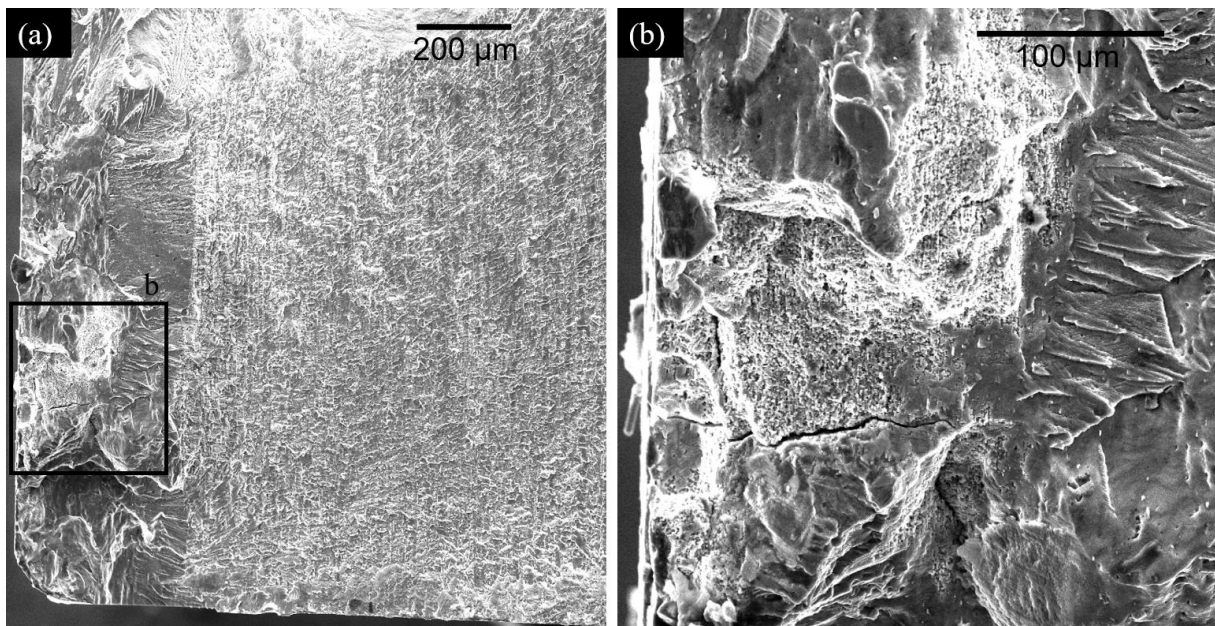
Fracture surface of as extruded specimen with 4 h pre-corrosion.
